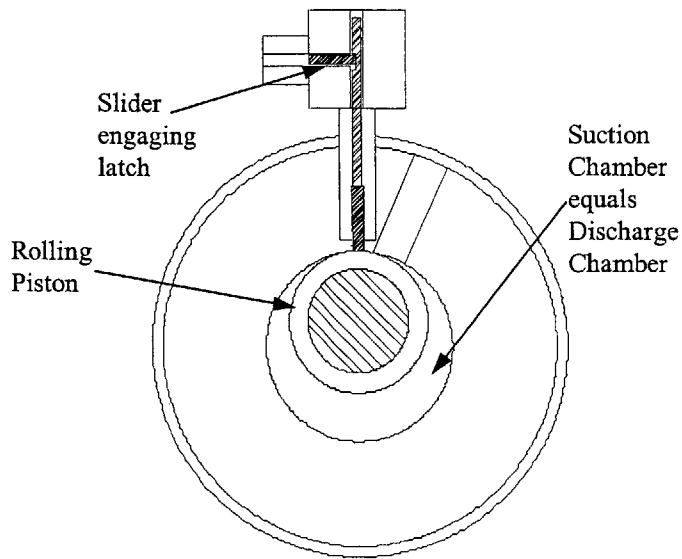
(Shows slider engaging latch in vane stem; note that this occurs where piston is at TDC)
